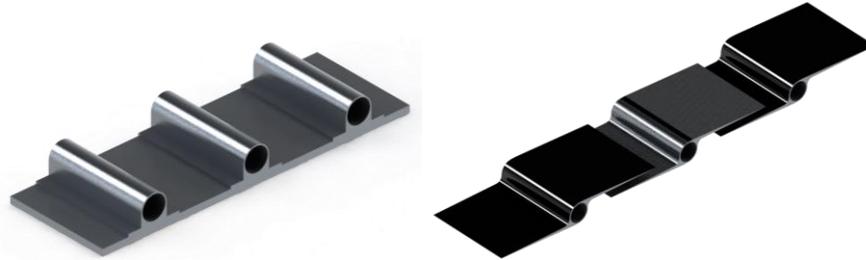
Thermal Shrouds – D-Tube on Sheet & Bat Wing
